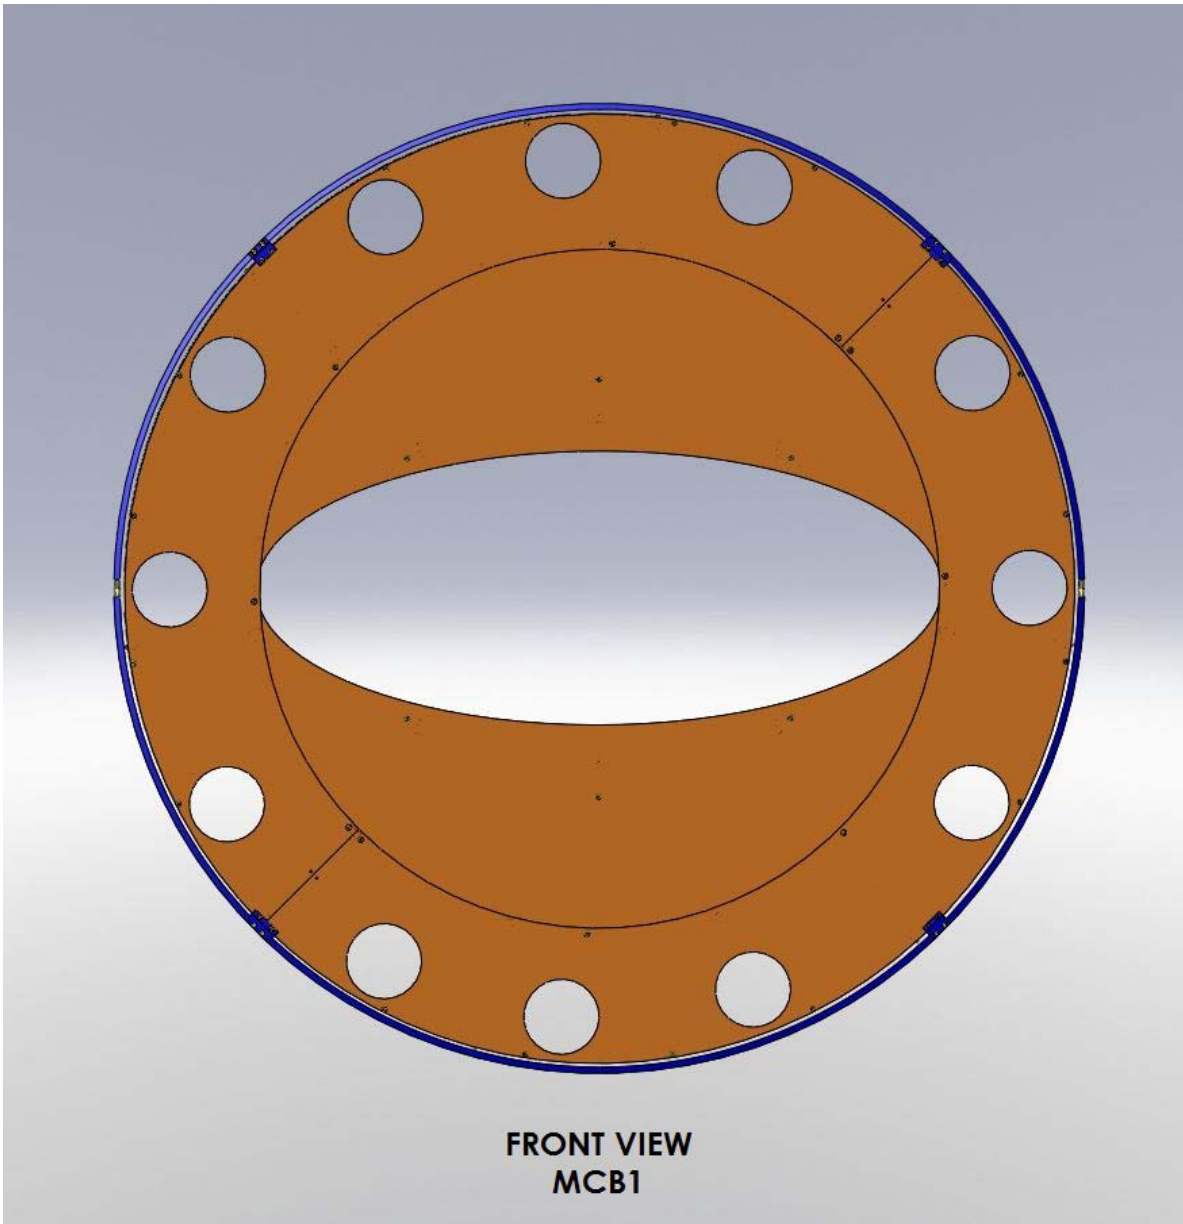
Front View of MCB1 Mode Cleaner Tube Baffle
